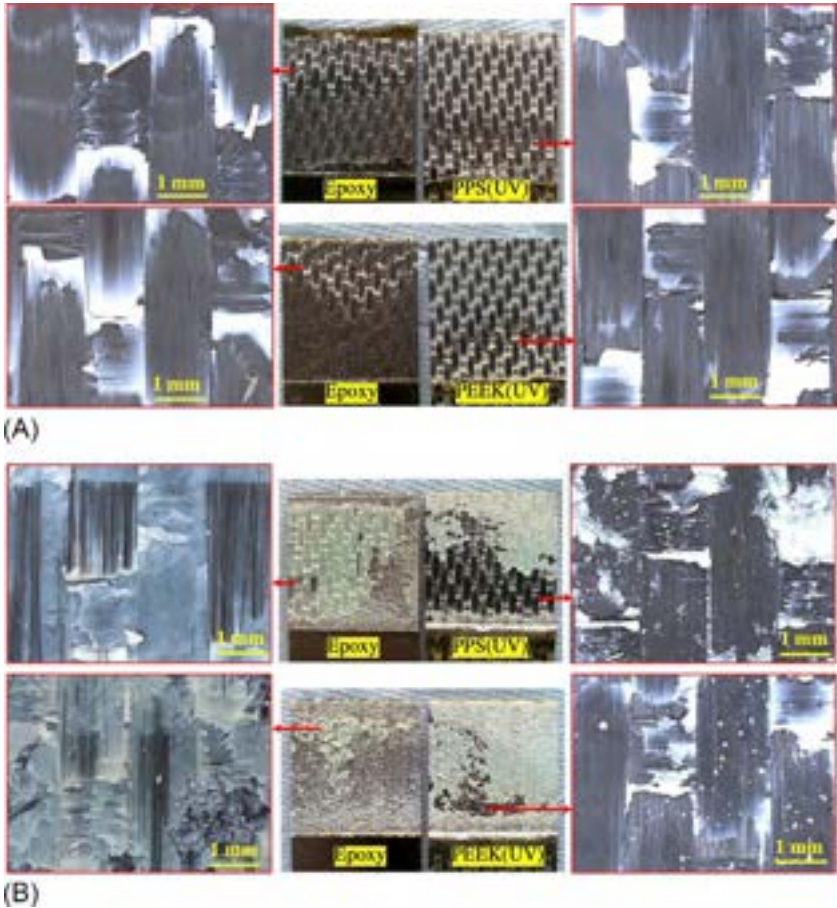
Typical images of the fracture surfaces of the lap shear specimens of the co-cure bonded TPC-TSC joints. (A) Joints without adhesives; (B) Joints with adhesives.
